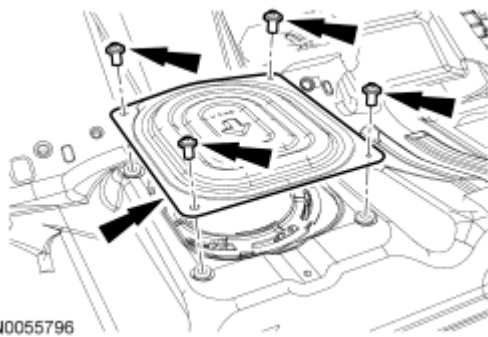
Identifying Fuel Pump Module Access Cover & Screws
